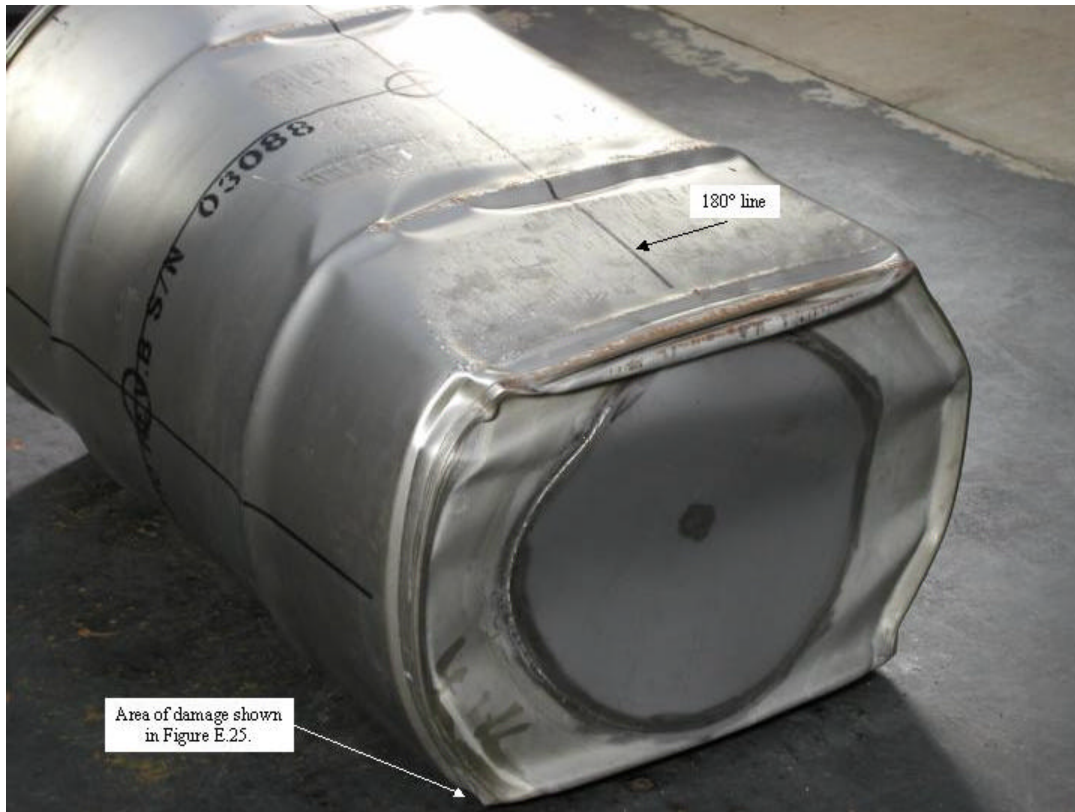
Results of the crush test on the bottom end with 500-kg weight impacting on the 180° line.
